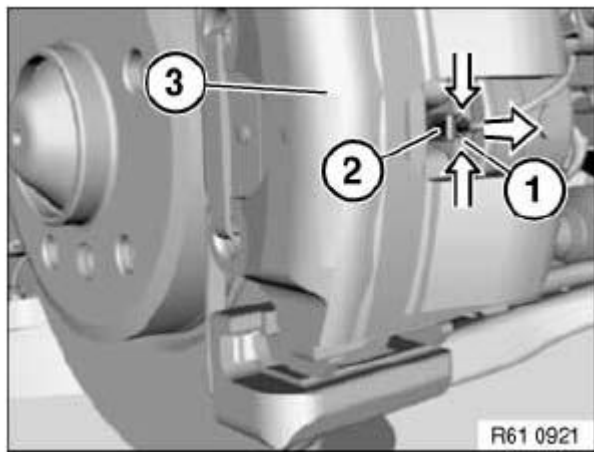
Identifying Clip, Brake Pad Sensor And Brake Pad
